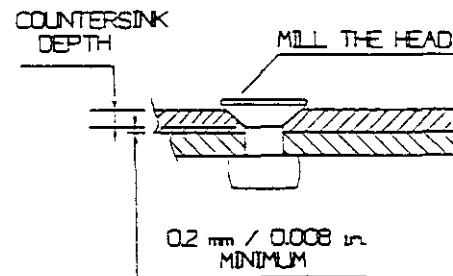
Repair of the Wing-Leading-Edge lower surface.
